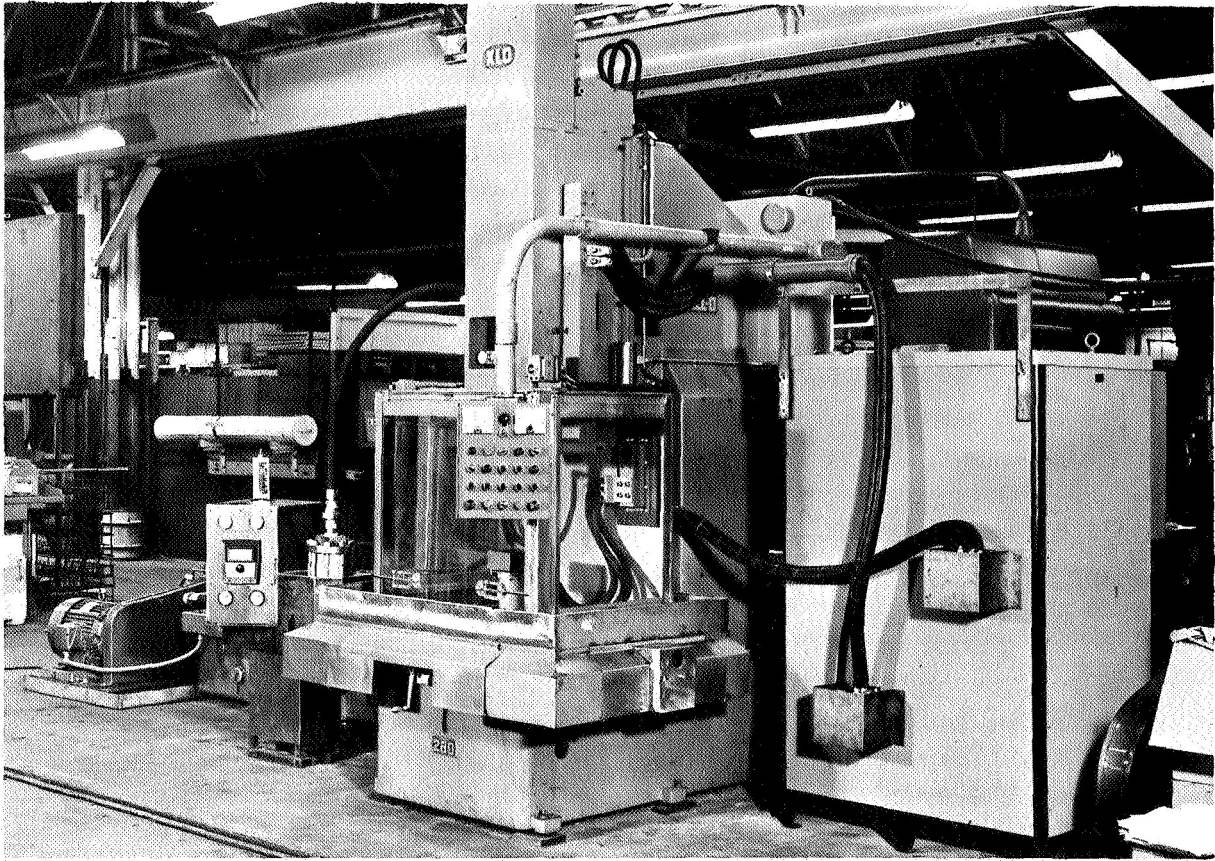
GENERAL PURPOSE ELECTROCHEMICAL MACHINING INSTALLATION (REF. 91)
